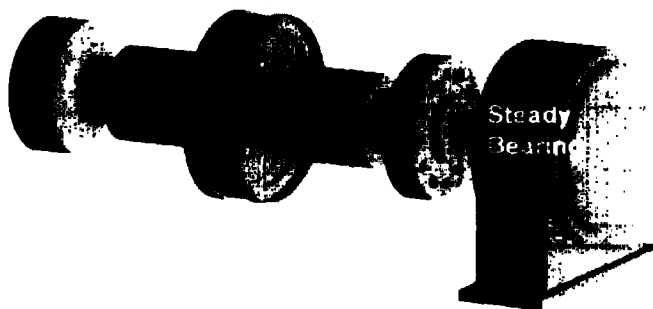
Schematic view of modified collector rotor system with a steady bearing
